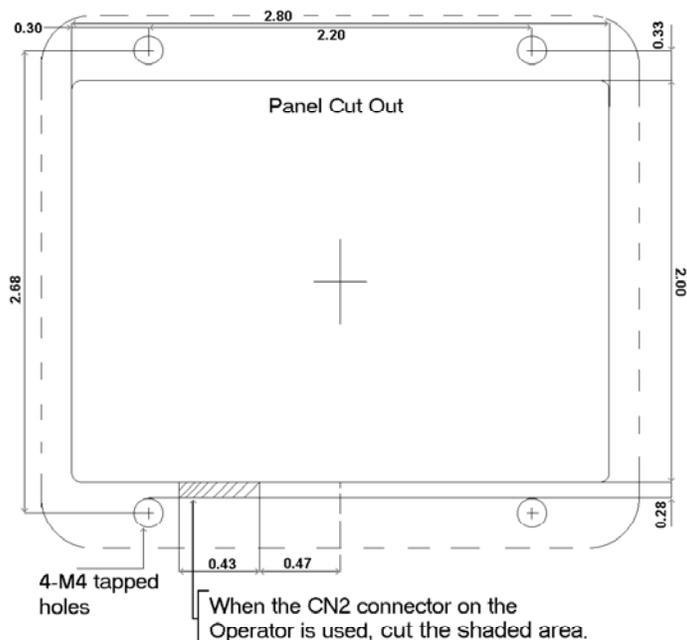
Surface Mount Cutout (dimensions in Inches, not actual size)
